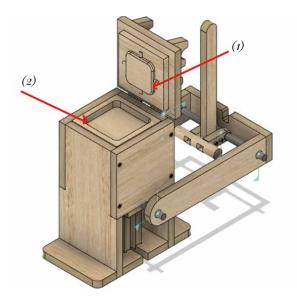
(1) Upper ashtray mold inserted in pocket lid (2) Protruding mold allowing easier extraction of the piece
